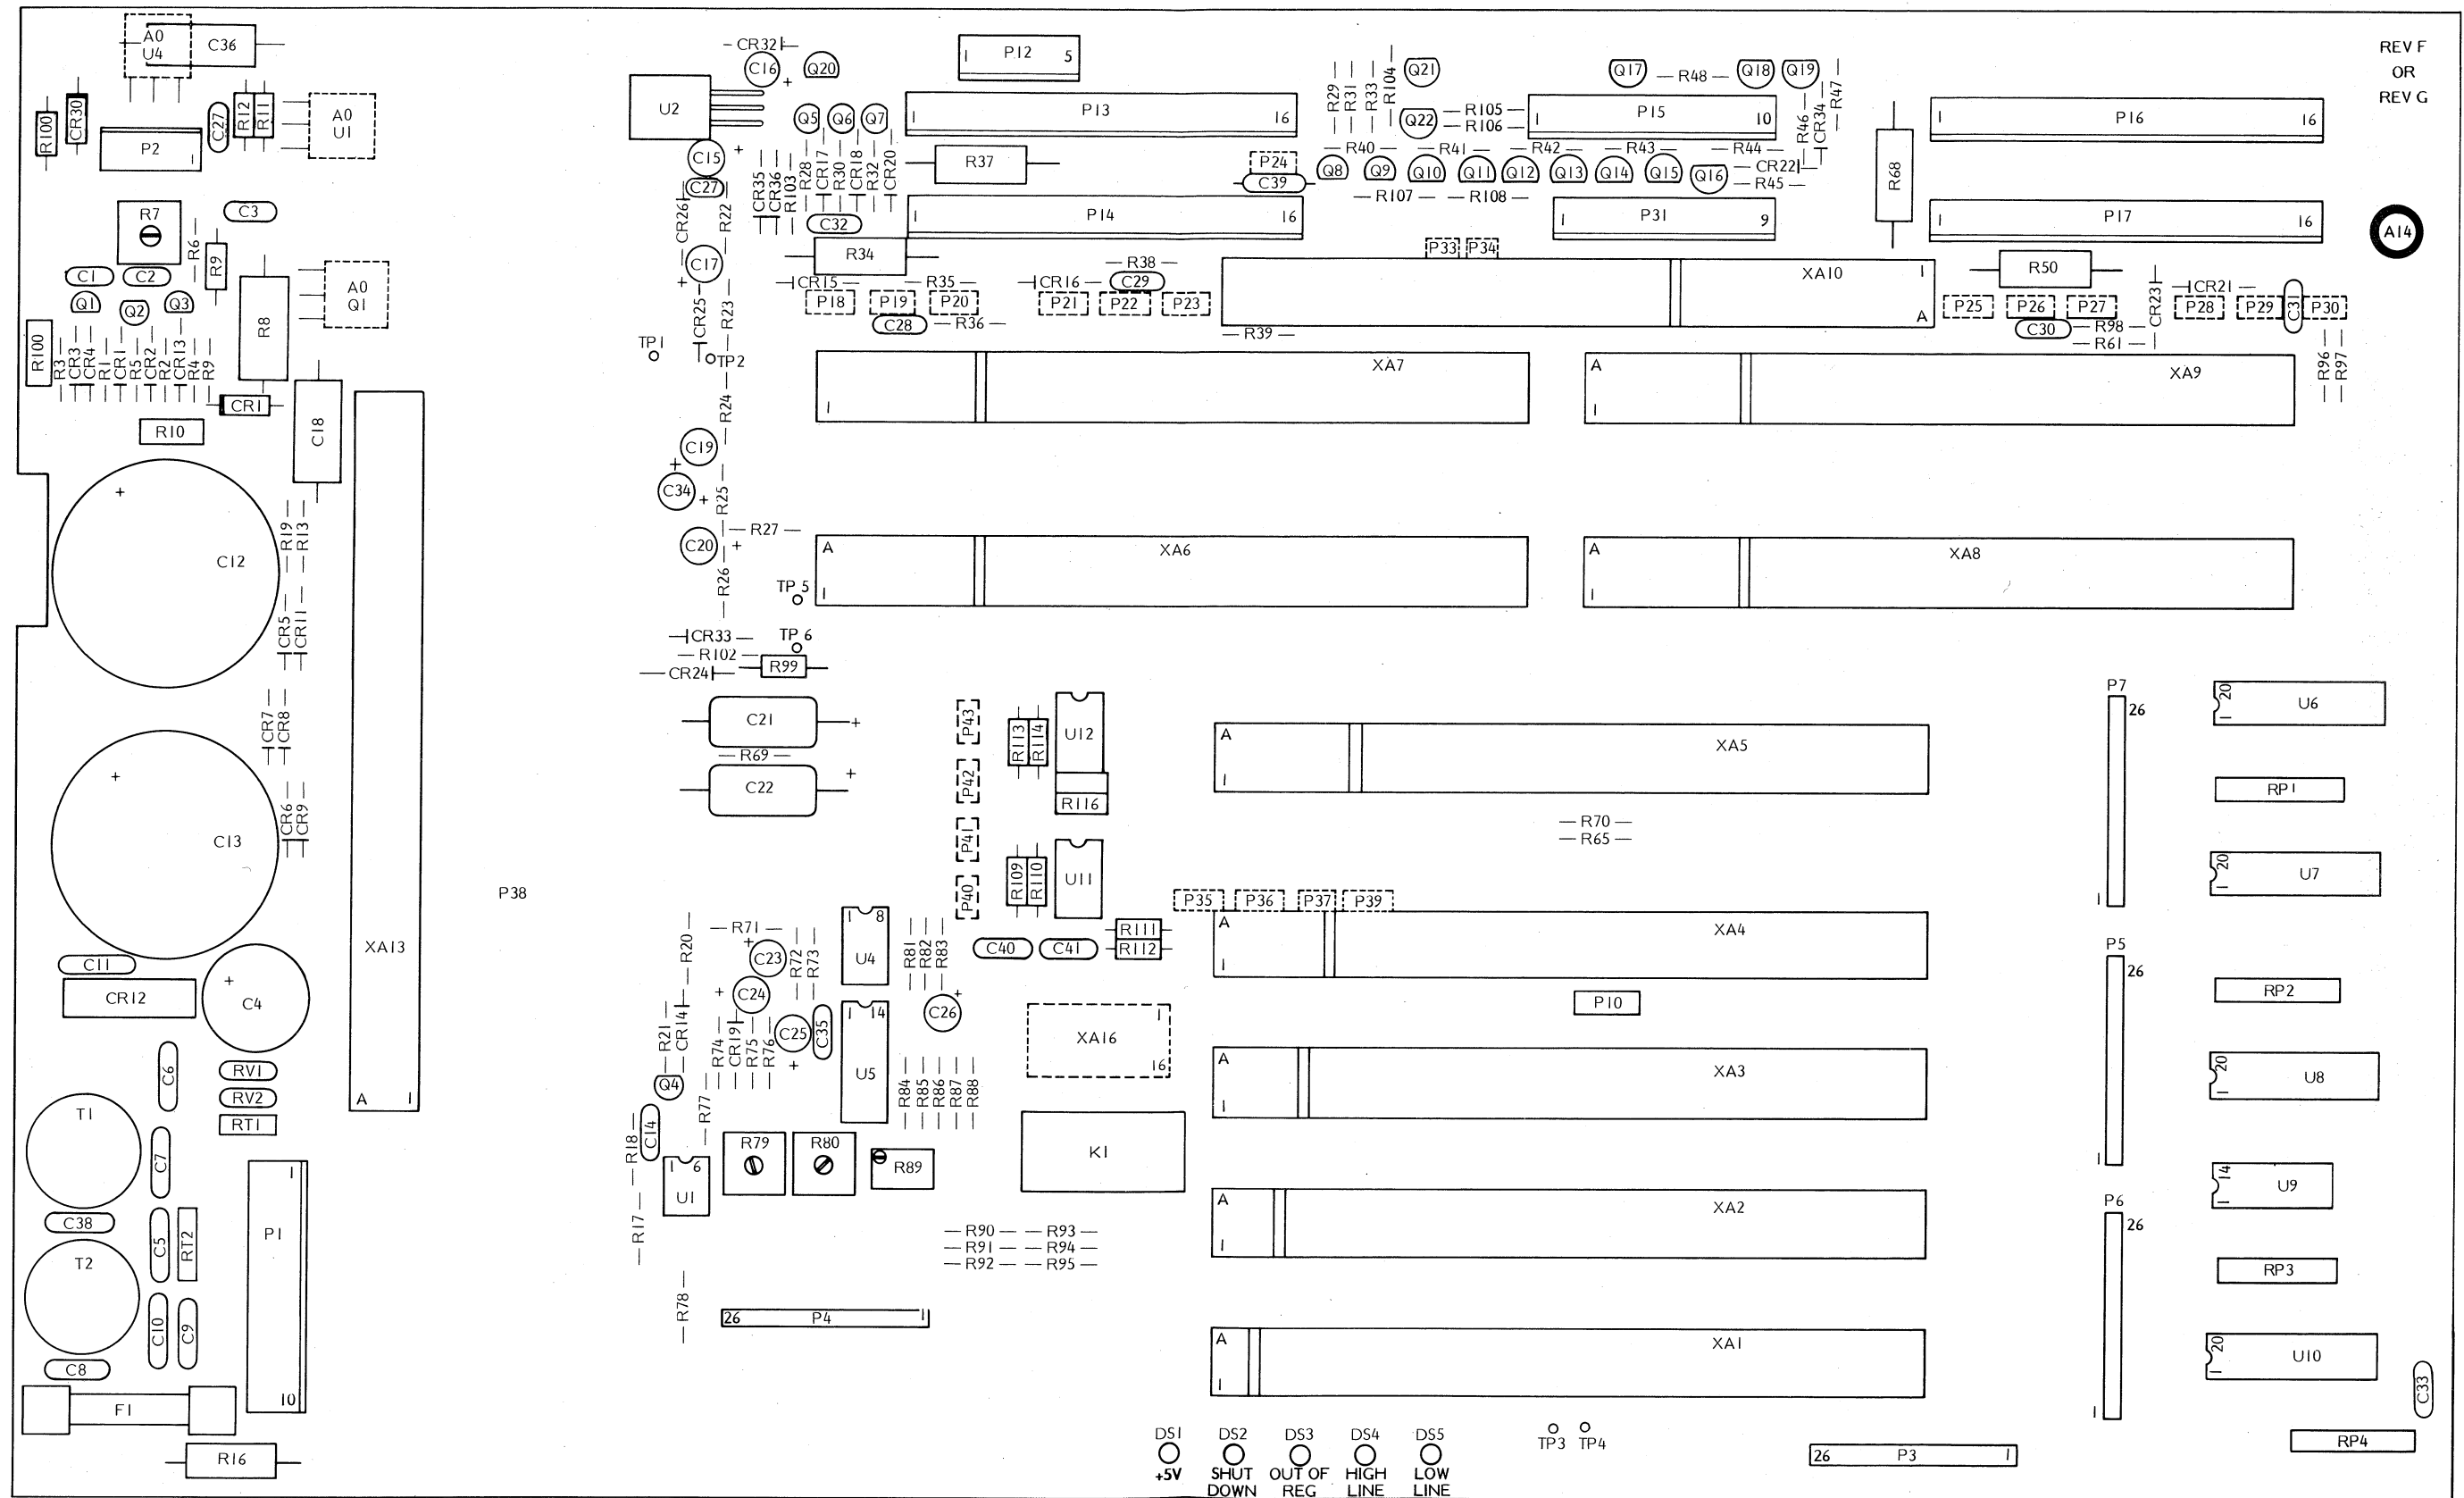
A14 Motherboard PCB Parts Locator Diagram
